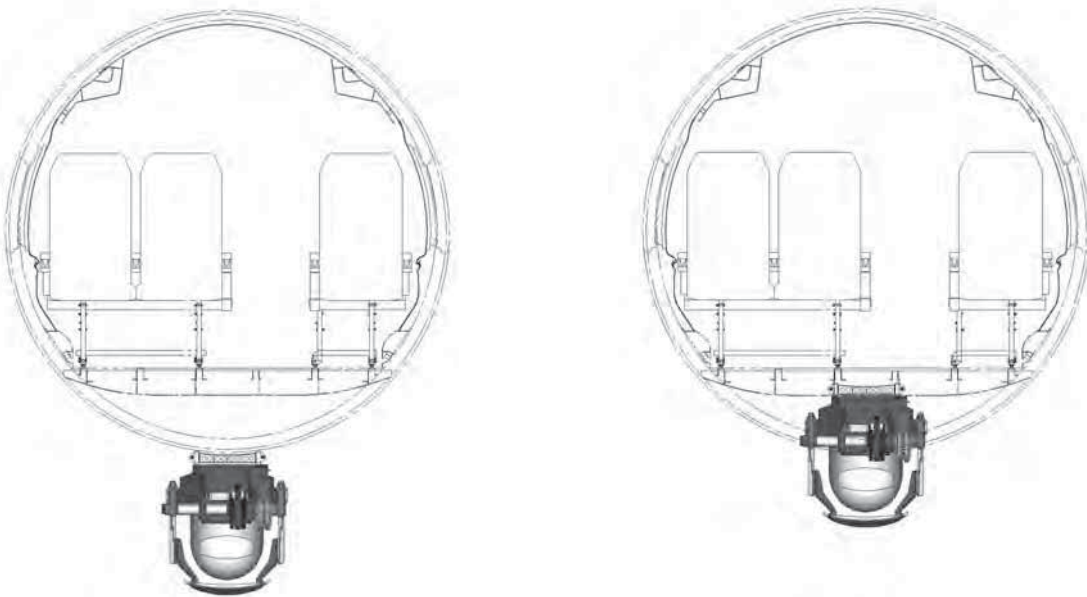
Final position of FLIR Turret Assembly after upward translation of 12" (306mm)
